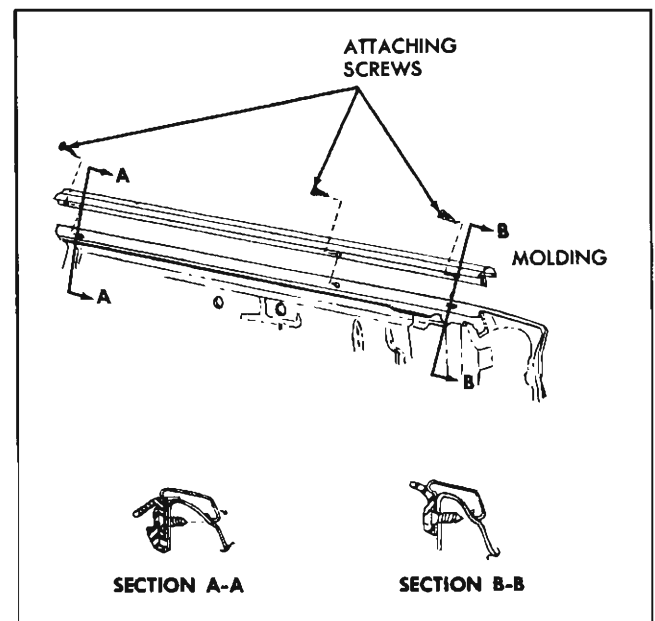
Door Window Glass Run Channel Outer Strip Assemblies (With Belt Reveal Molding)
